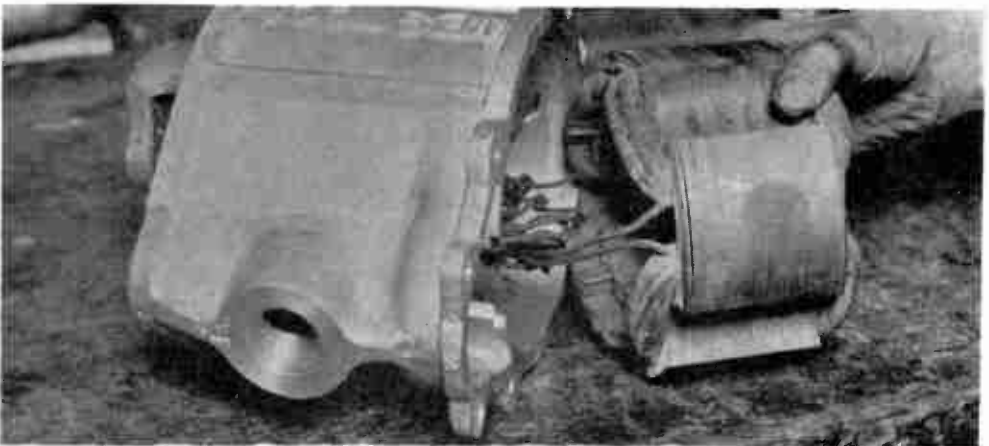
HOW TO REMOVE THE STATOR FROM THE DRILL HOUSING.
